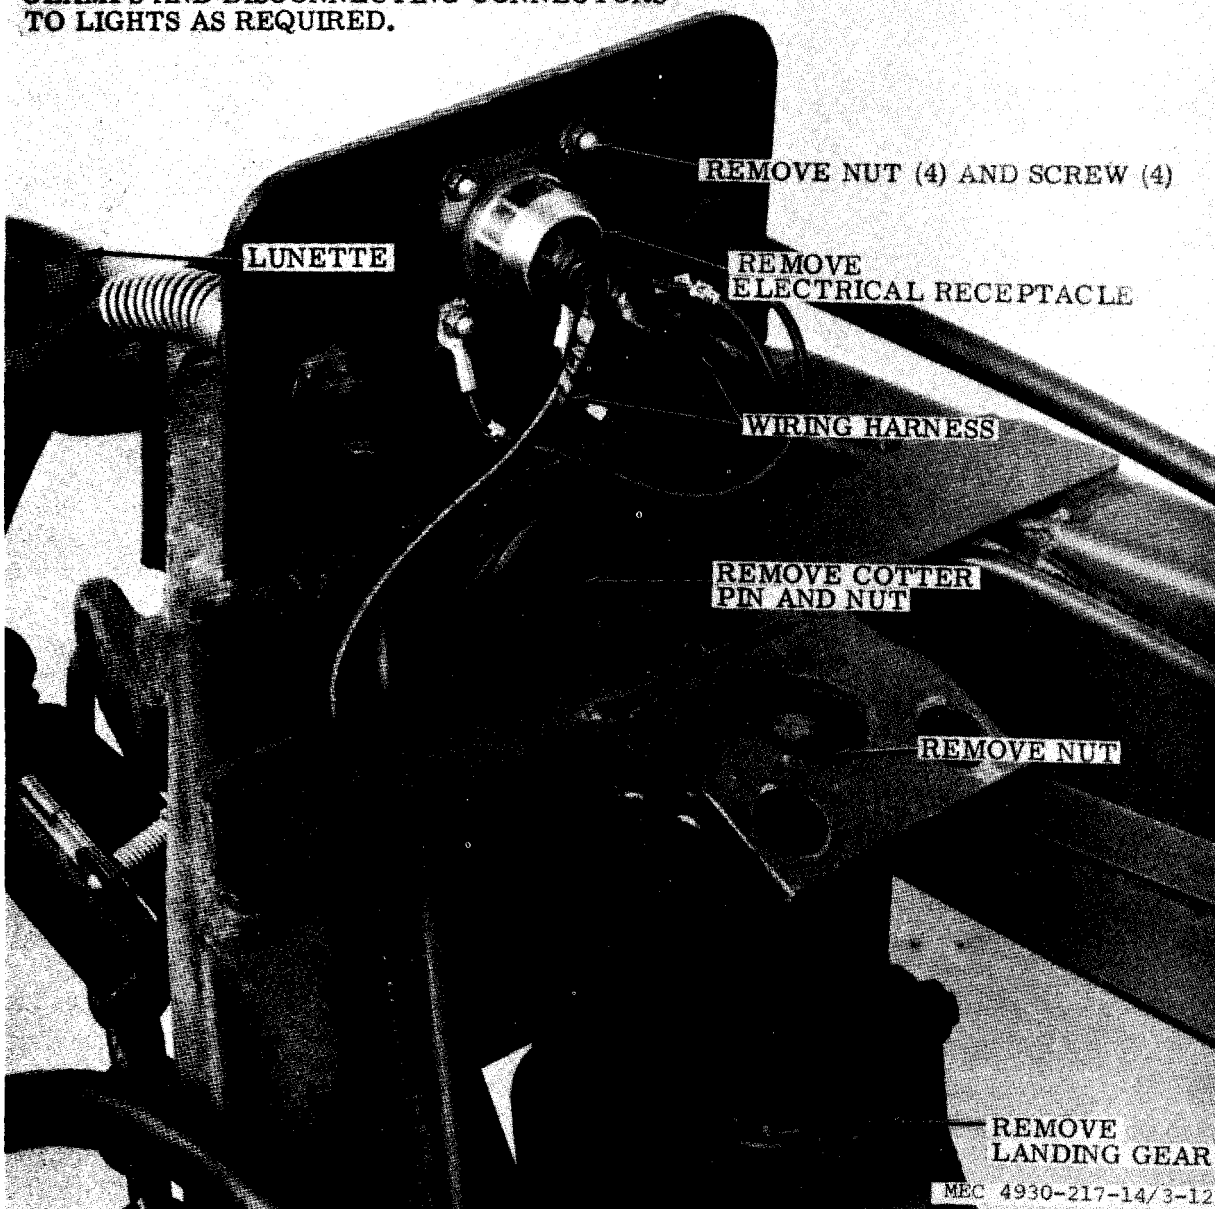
Landing gear, electrical receptacle, lunette and wiring harness-removal and installation.
